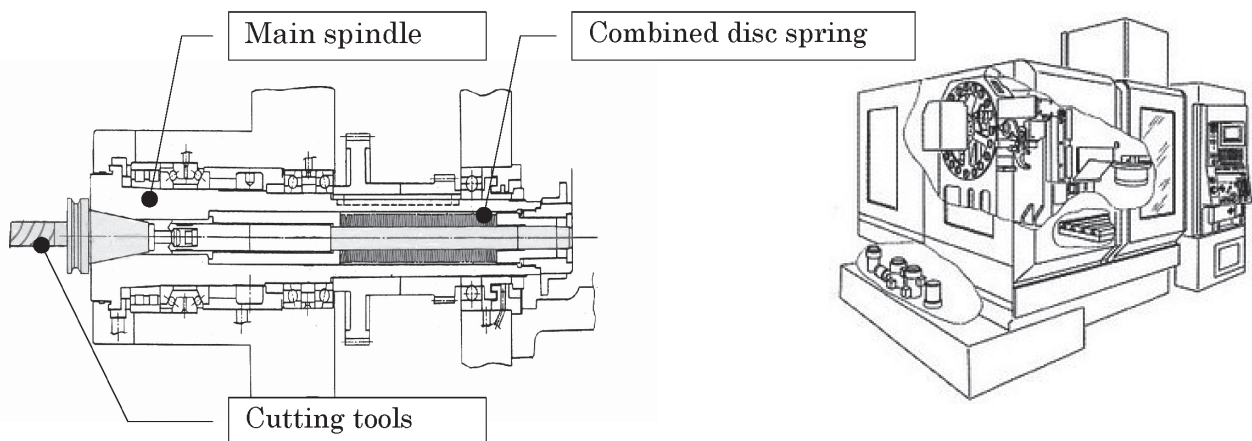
Example of disc spring set used for spindle of high-speed rotation machining center.
